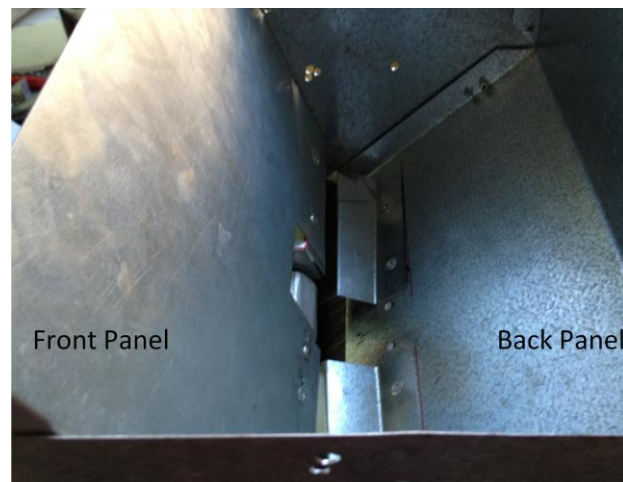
A look inside the holding bin of Prototype-1, the bottom angles of both the front and back panels were adjustable to determine the angles that maximized slip feed rate.
